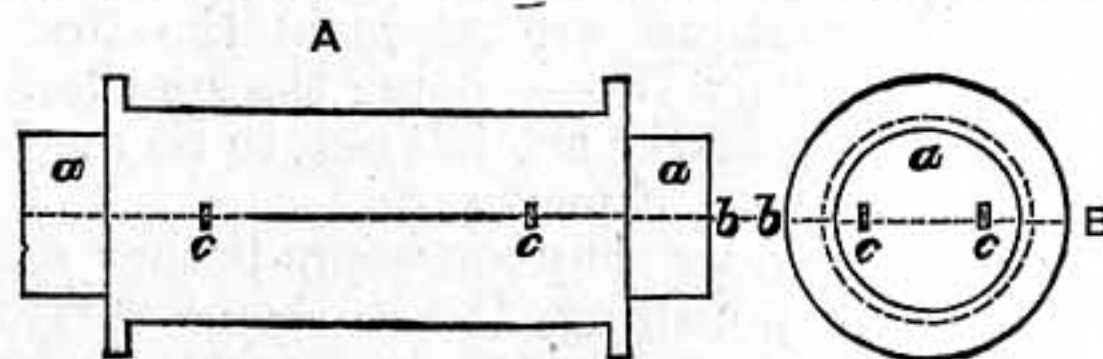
Pattern for Cylinder in Side View (A) and End View (B)—*a, a'*, Prints of Cores; *b*, Line showing Cut through Centre; *c*, Pins for dowelling same.
